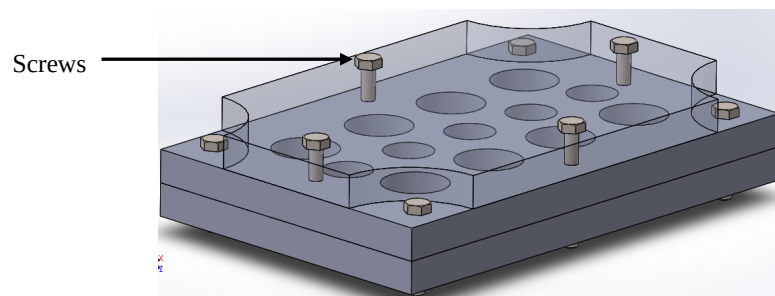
Assembled 3D design of the mould, screws are used to fasten the moulds.
